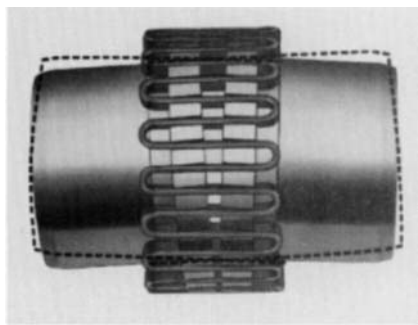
Metallic grid coupling with cover removed to show grid detail. (*Falk Corp.*)
